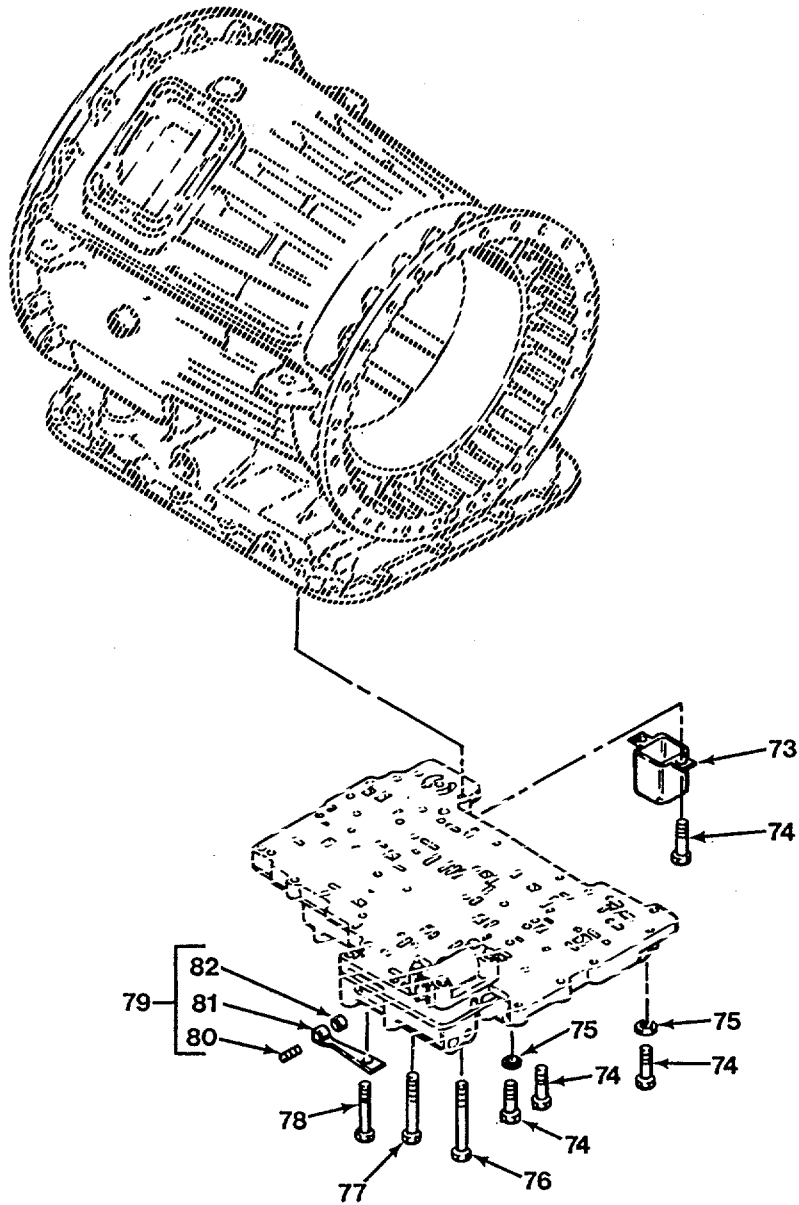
Control Valve Assembly, Sheet 3 of 3
